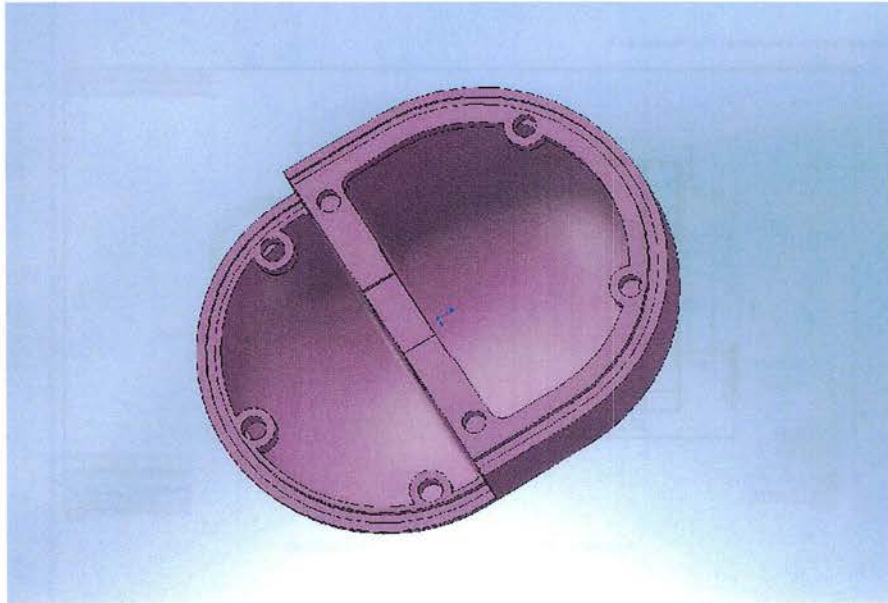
FRONT VIEW CHEST JACKET DRAWING
